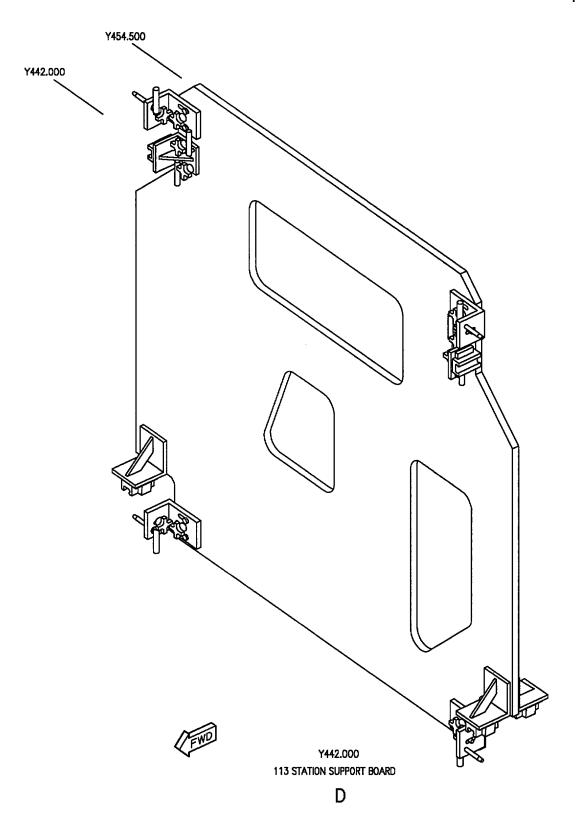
Engine Air Inlet Maintenance Fixture; RE174322020-1 (Sheet 5)
